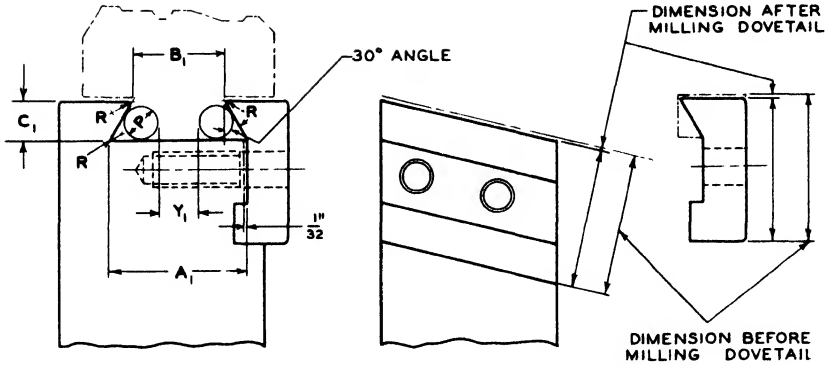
Standard Dovetail Tool Holder for Acme-Gridley Automatic Machines
